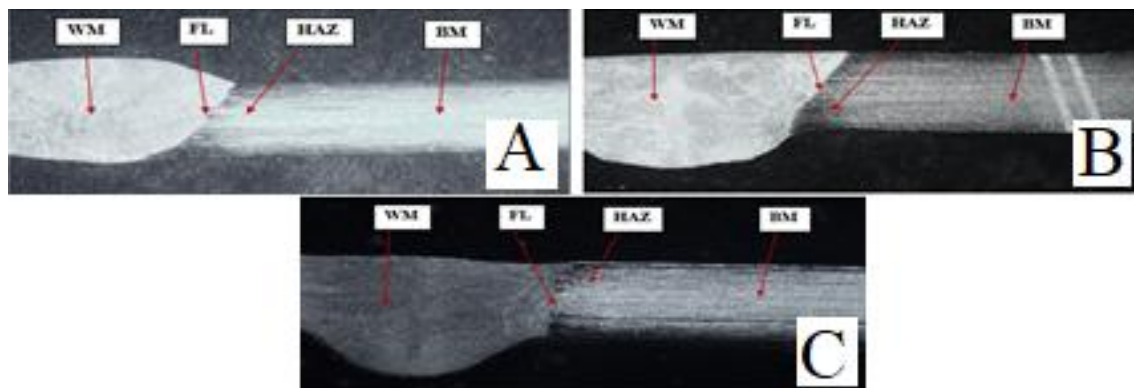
Macrostructures image of welding specimen at varying welding current a. 30 A, b. 40 A, and c. 50 A
